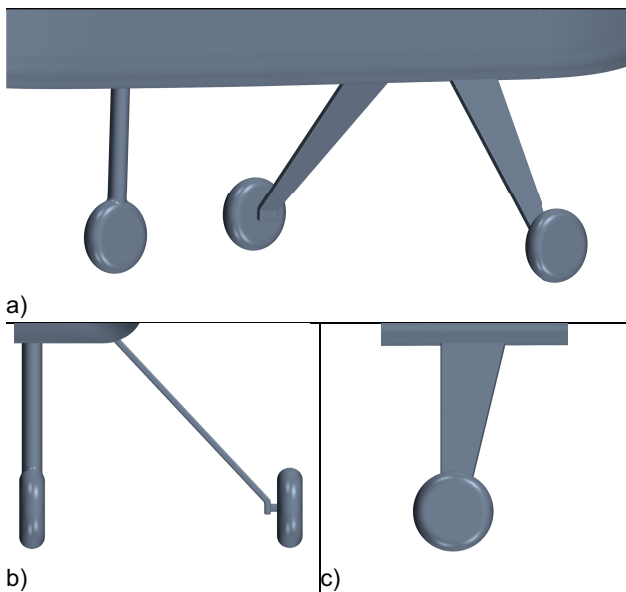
Fixed-unfaired (baseline) landing gear configuration: a) isometric view, b) front view, c) side view of main landing gear
